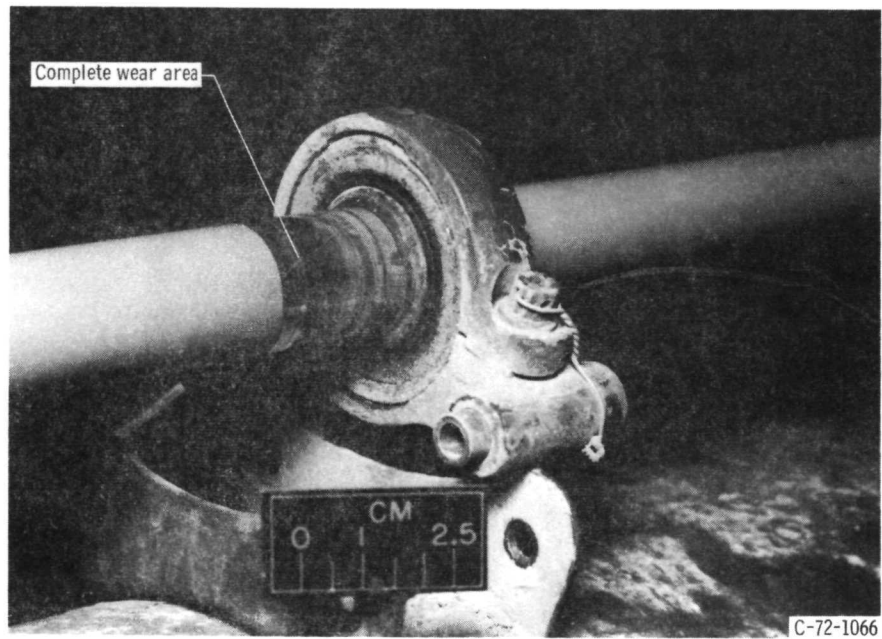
Close-up of failed bearing showing wear area on shaft.
